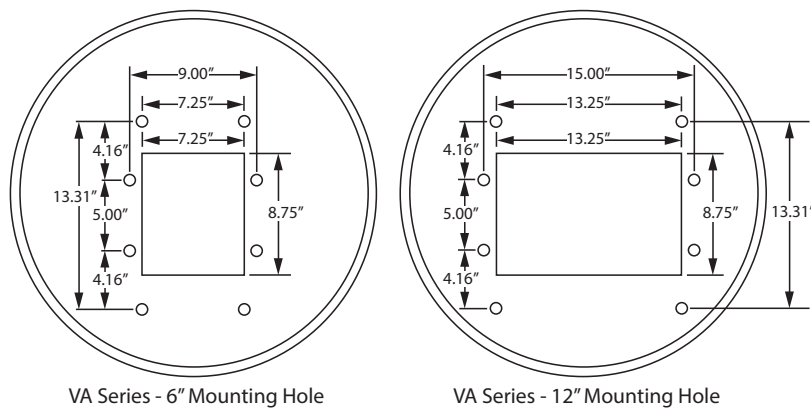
Mounting Hole/Stud Locations for standard VA Series (6" Mounting Hole) and the VA Series (12" Mounting Hole) burners
